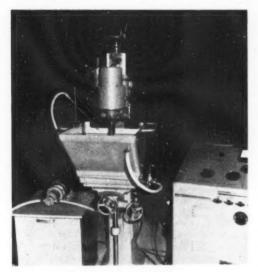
Ultraelectric machine which combines the techniques of ultrasonic and spark-erosion machining
